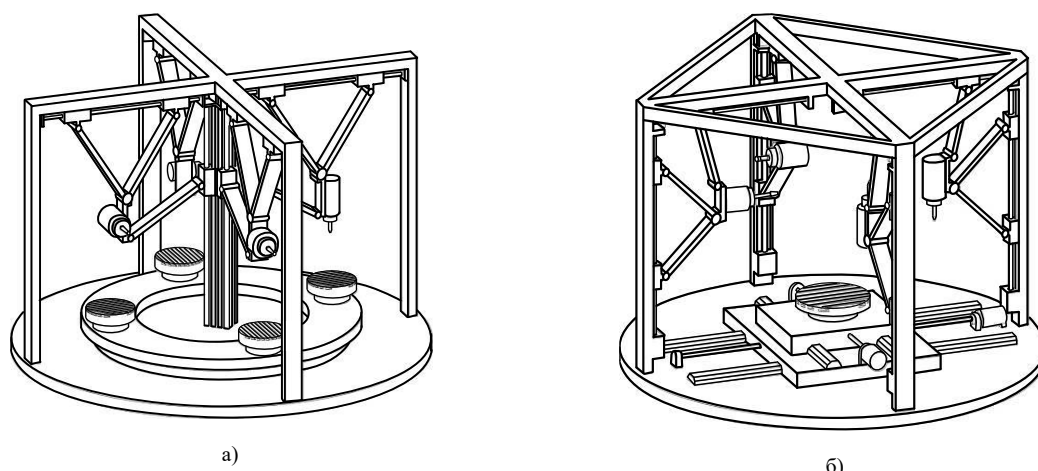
The layout of a four-spindle drill-milling machine: a – with separate working zones of the MPS; b - with crossed working zones of the MPS / Компоновка чотирьохшпindelьного свердильно-фрезерного верстату: а – з різними робочими зонами МПС; б – з робочими зонами МПС, що перетинаються
